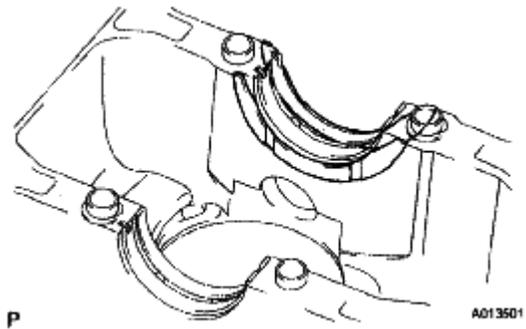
Identifying Crankshaft Thrust Washer Upper
